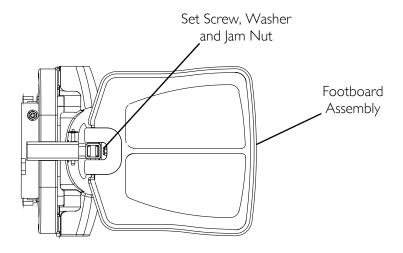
Adjusting the Footboard Assembly - Angle
